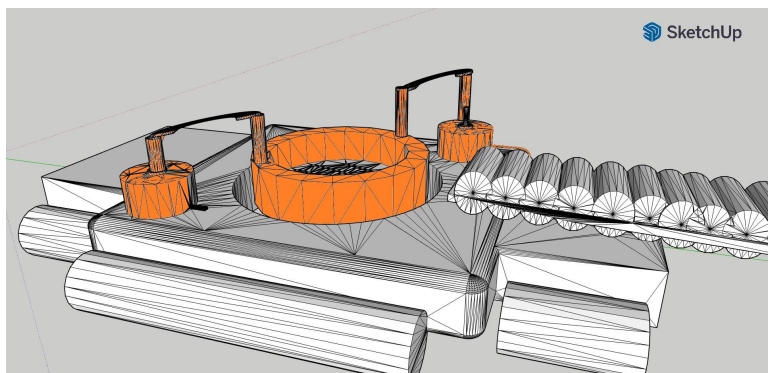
(right): Initial CAD Intake Rendition 1, is a CAD model of the intake system (highlighted orange): comprised of two motors, a pullet, and the intake
